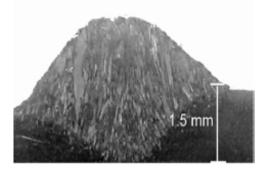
Cross-section of weld pool for sample S1 (90% Ar + 10% CO₂) [2]
